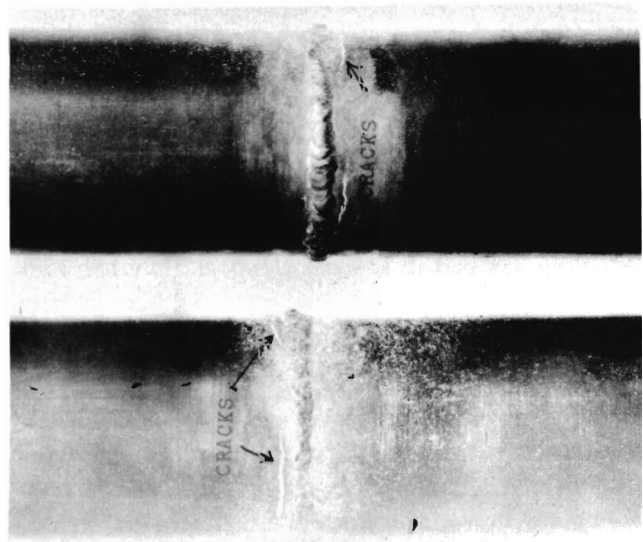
Reproductions of welded sections photographed after Magnaflux Inspection which showed up small internal cracks in the welds as indicated by arrows.
